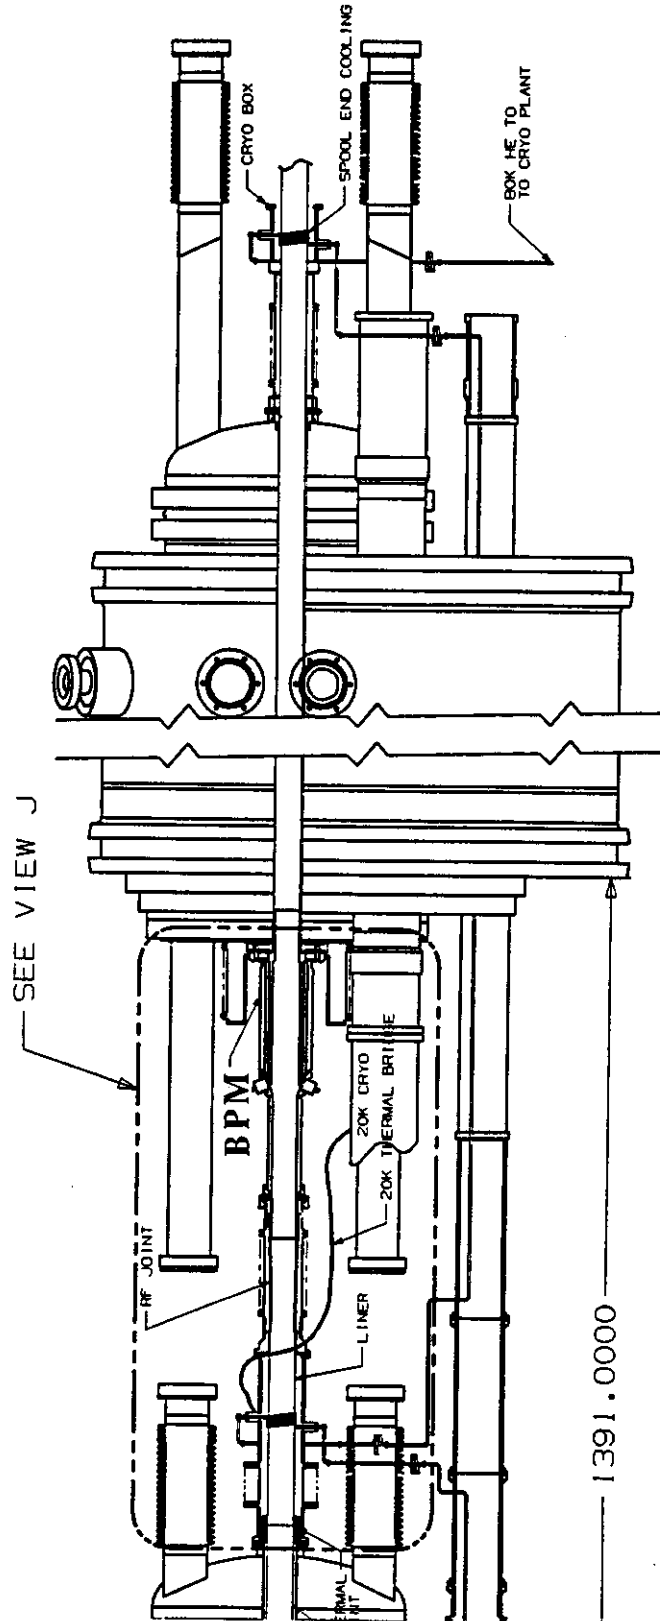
Figure. A schematic of Spool Piece retrofit liner assembly with an end conductive cooling loop and liner interconnect. The cross section of the interfaces of collider spool piece, BPM and CQM are indicated.
